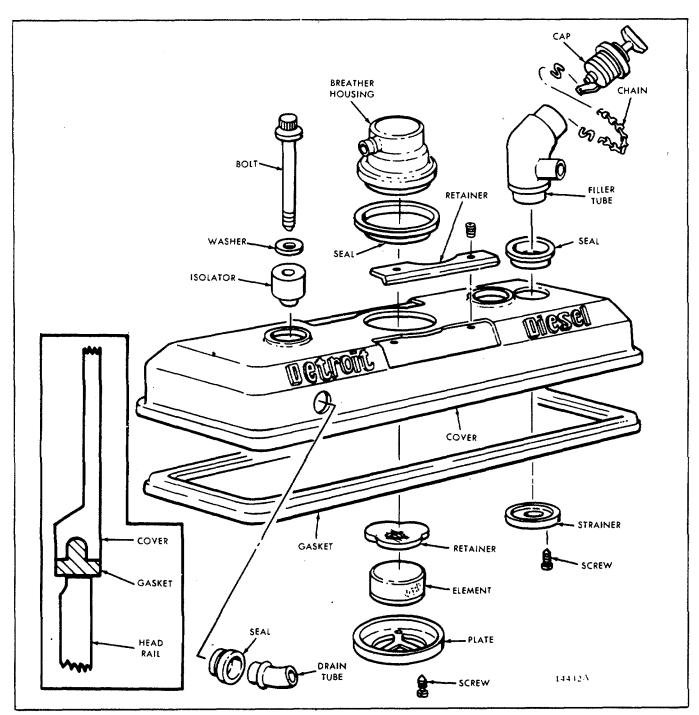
Typical Current Valve Rocker Cover Assembly
